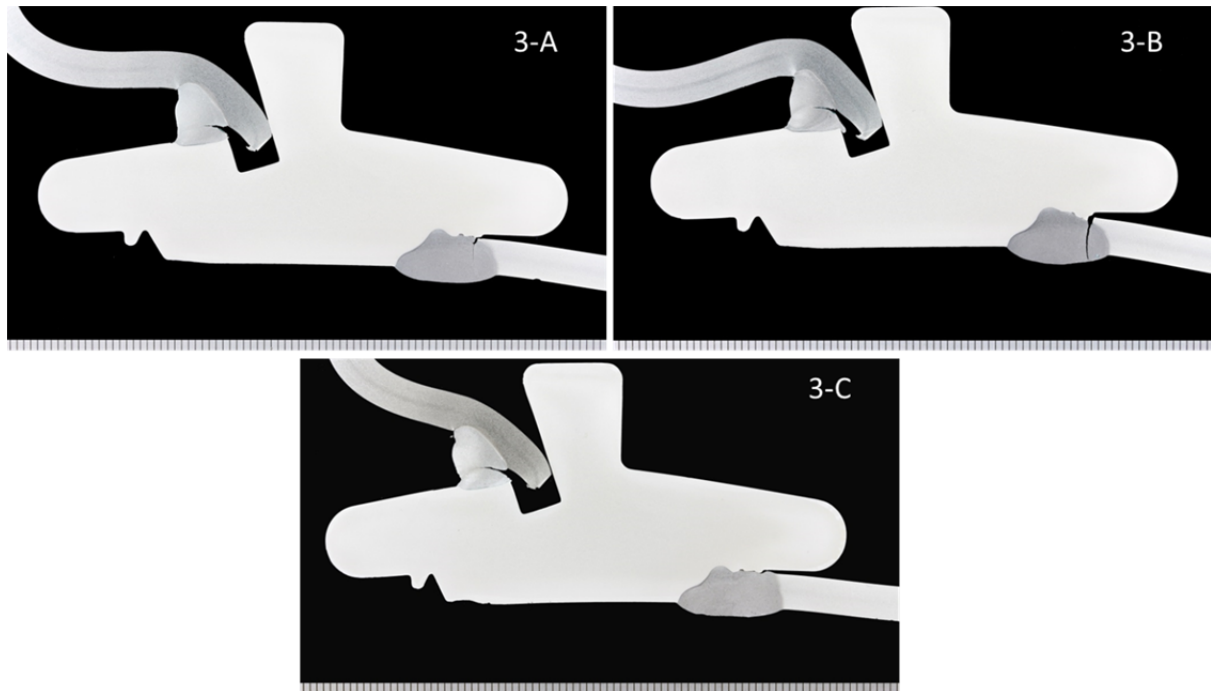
Samples 3-A, 3-B and 3-C from J2580. Sample 3-B shows both the weld throat cracking and the circumferential weld cracking. All samples show various stages of weld throat rupture of the rim joint weld.
